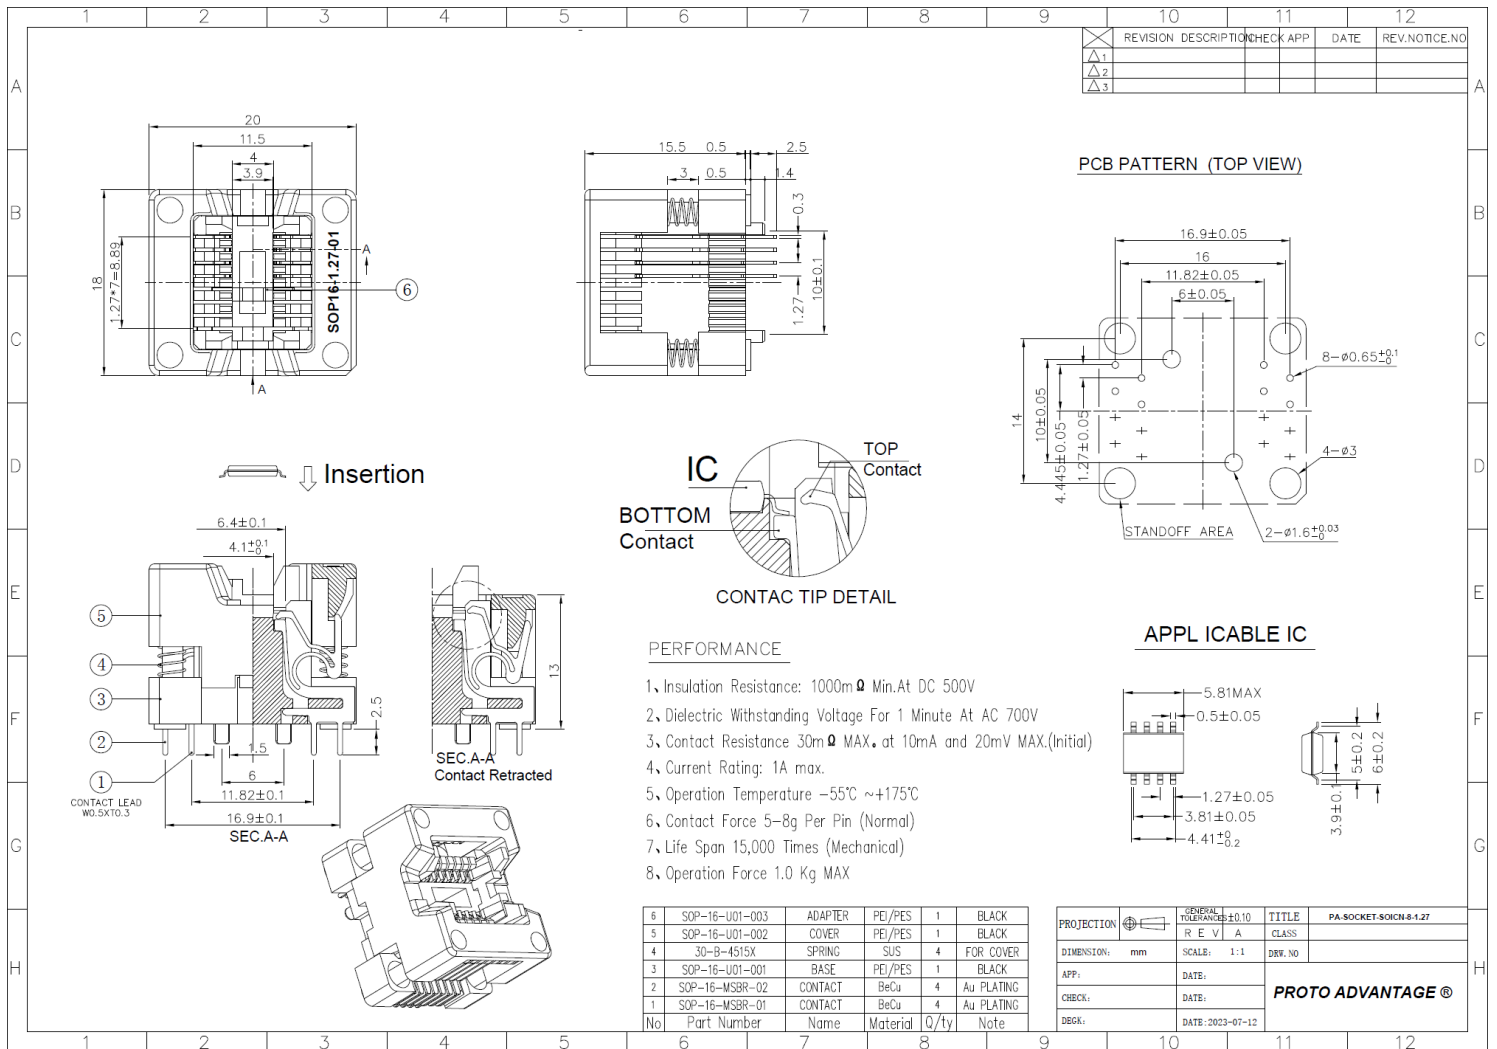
Proto-Advantage PA-SOCKET-SOICN-8-1.27 Socket Drawing
